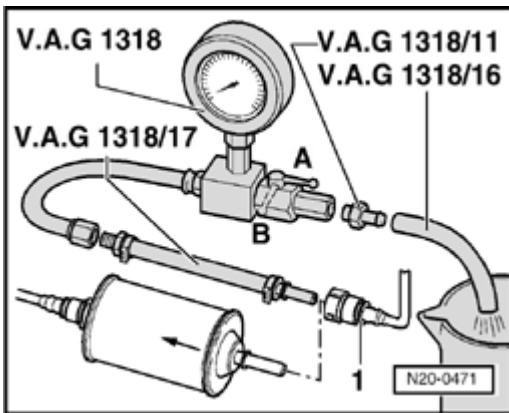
Connecting Pressure Gauge VAG 1318 To Hose With Adapter VAG 1318/17 To Fuel Filter
